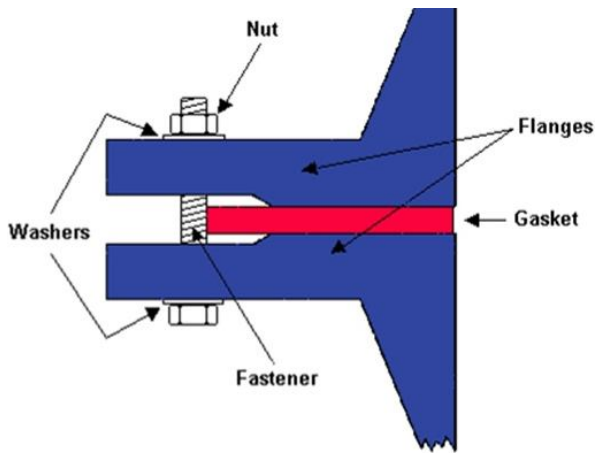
Welded Neck Raised Face Flange showing gasket seal
